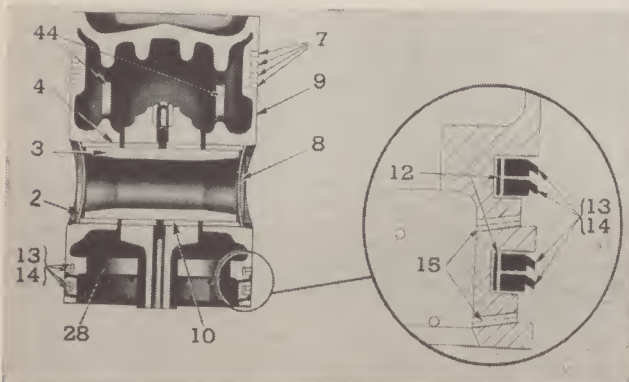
B—A GM engine piston, rings and piston pin assembly.
